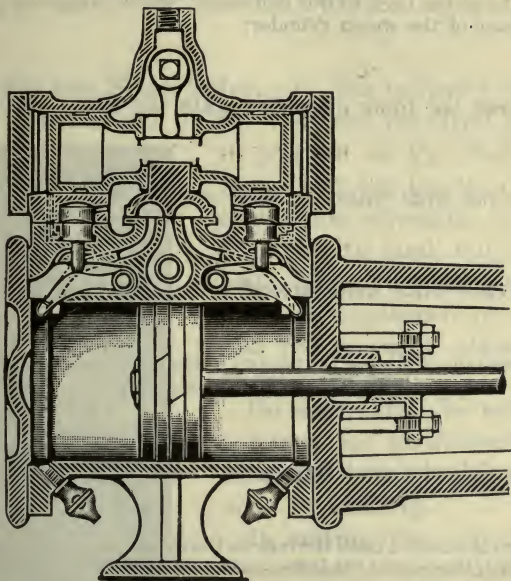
Valve gear of the McGowan pump. Its main valve is of the B form and is driven by a valve piston. Steam enters the central port in valve seat and into the cylinder through one of the cavities in the valve and exhausts through the opposite. The two tappet valves cover the auxiliary ports, shown by dotted lines, leading to the ends of the steam chest and connect with the main exhaust ports. When the piston reaches the end of its stroke it lifts one of the tappet levers and with it the corresponding valve is raised from its seat, opening the port leading from the end of the steam chest to the main exhaust port. The pressure is thus relieved on one end of the valve piston and the steam pressing on the opposite end forces the valve piston to the opposite end of its stroke, thus reversing the distribution of steam to the cylinder and starting the piston on its return stroke. The main valve is connected with the valve piston so that all lost motion is taken up automatically. A rocker shaft, extending through the steam chest carries a toe moving in a slot in the top of the valve piston, so that the valve can be moved by hand.
